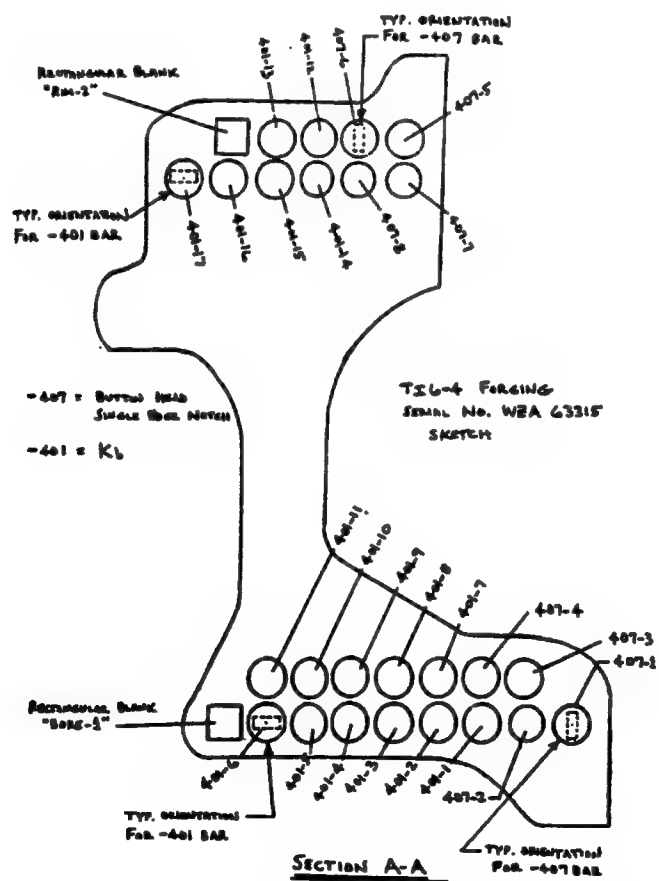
Ti-6-4 SPECIMEN CUTUP PLAN (CROSS SECTION)
